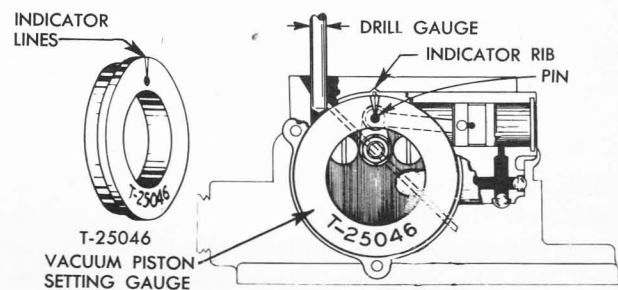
Setting Vacuum Piston with Gauge T-25046
